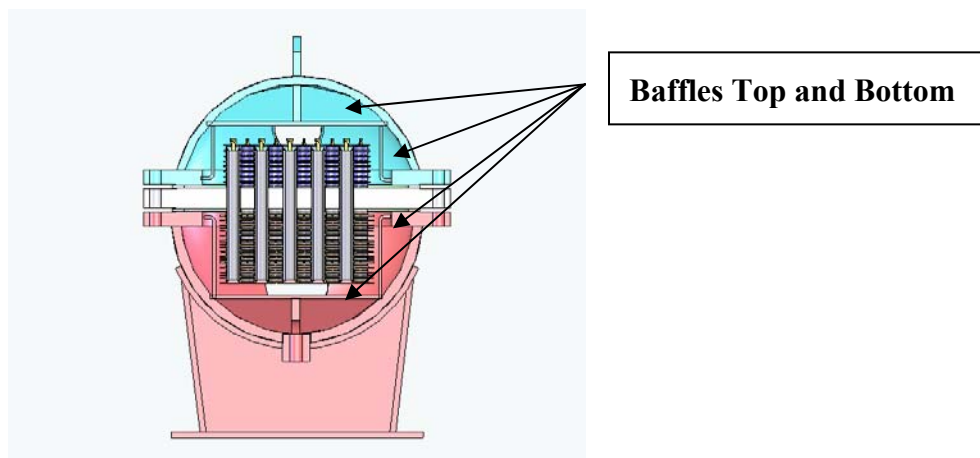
Front View of HP-BAC Showing Welded Baffles to Help Prevent Flow-Bypass.
